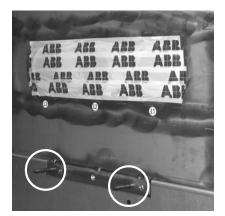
Fitting the guide pins using a threaded plate
